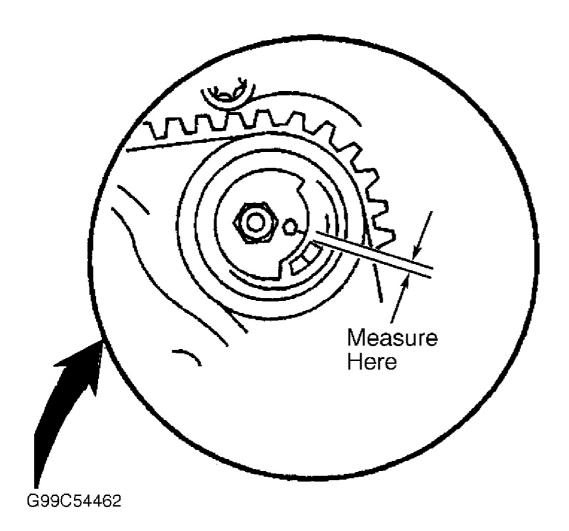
Adjusting Timing Belt Tension (New Design Engine Shown; Early Design Engine Is Similar) Courtesy of GENERAL MOTORS CORP.
